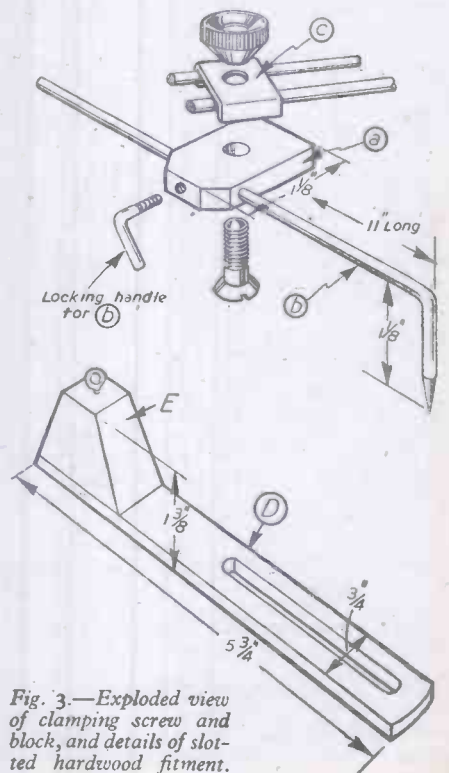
Exploded view of clamping screw and block, and details of slotted hardwood fitment.
